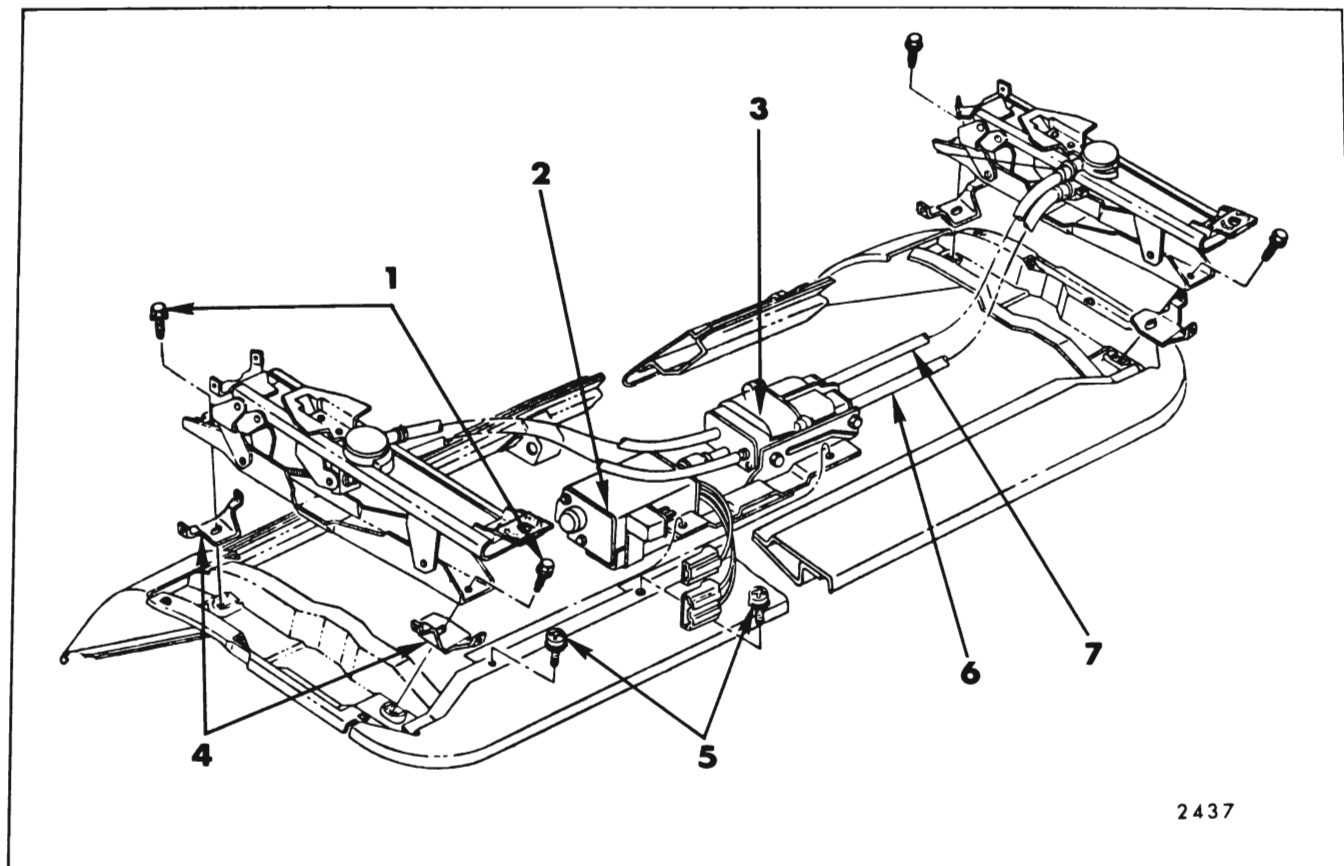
Front Seat Assembly - Four-Way Tilt - "A" Styles
